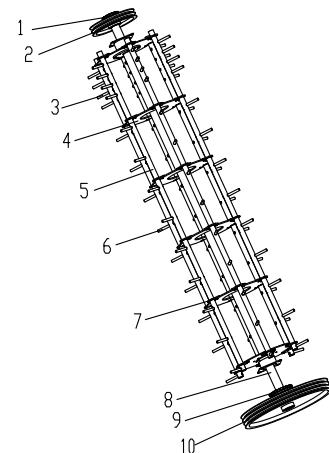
Structure diagram of axial cylinder: 1. Sprocket; 2. Small pulley; 3. Spike teeth of vine discharging; 4. Toothed rod mounting disc; 5. Toothed rod; 6. Spike tooth; 7. Toothed rod connector; 8. Transmission shaft; 9. Double row sprocket; 10. Large pulley.
